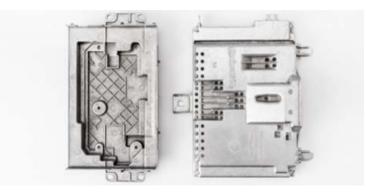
Magnesium car audio heat sink and touch-panel housing [1]
